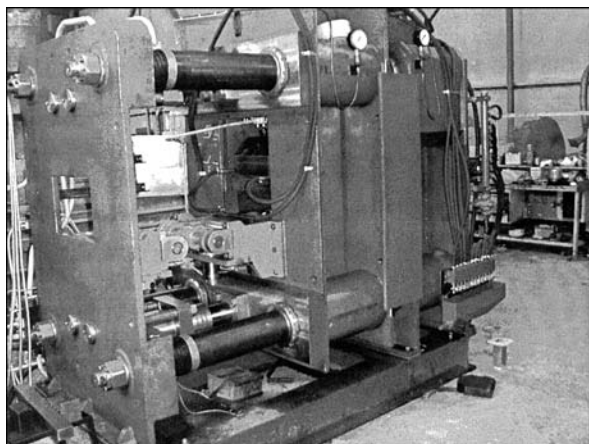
Flash-butt welding machine K1003 for joining massive rolled sections
